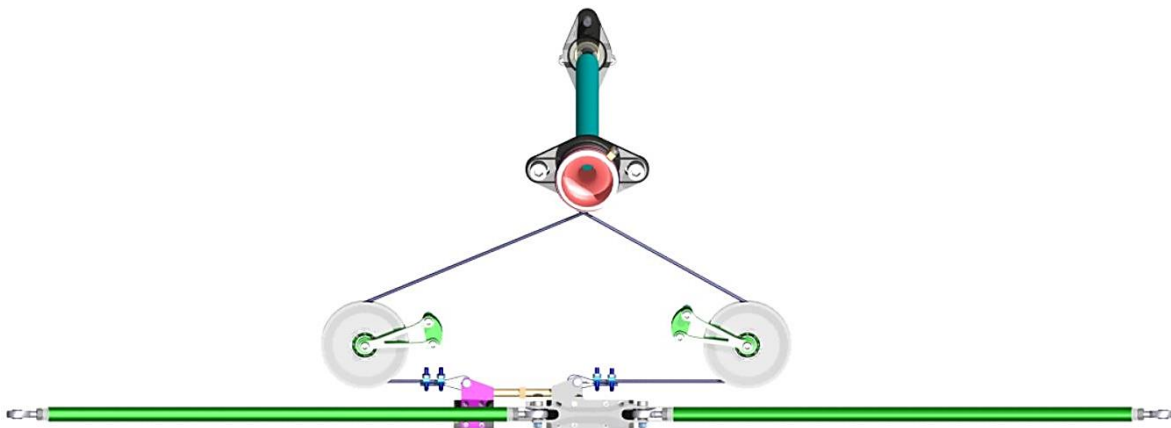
muc022 Steering System (frontal view) (Final CAD Drawing, CATIA V5)
